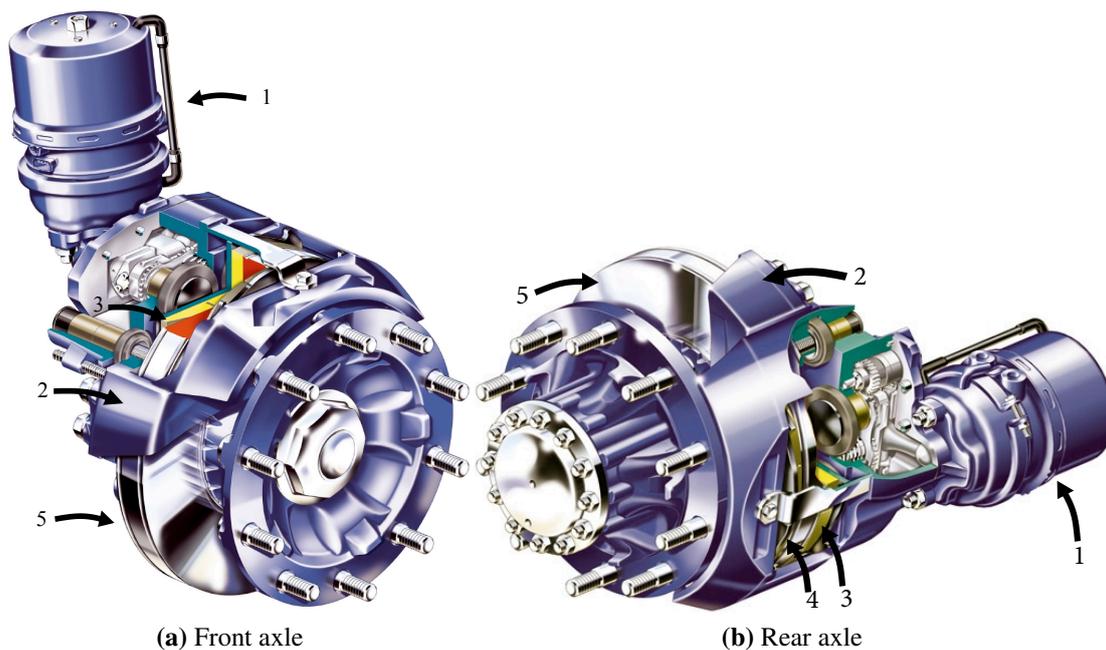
Pneumatic disc brake units from a Volvo truck. A brake cylinder (1) is connected to the brake calliper (2), which is holding the inner and outer brake pads (3, 4). Between the brake pads lies the brake disc (5) which is rotating along with the wheel. When the two brake pads (3, 4) are brought closer a frictional force is generated between the pads and the disc.
